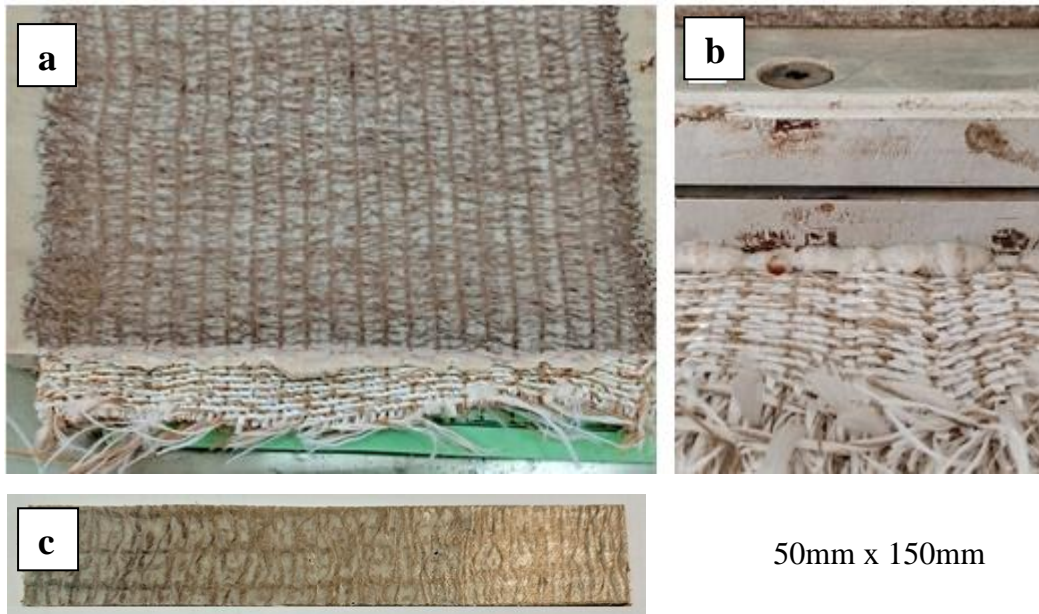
(a) The 3D woven commingled jute/PP composite sample after fabrication, (b) zoomed-in view during fabrication, (c) tensile sample ready for testing
